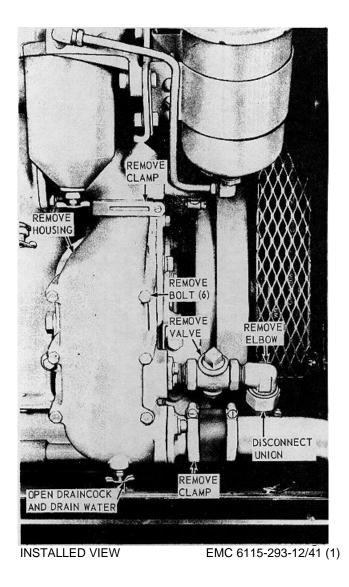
Oil cooler, bypass valve, and coolant shutoff valve, removal, disassembly, reassembly, and installation.
